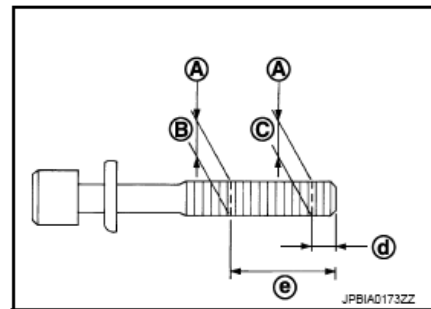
Measuring Cylinder Head Bolts Outer Diameter
